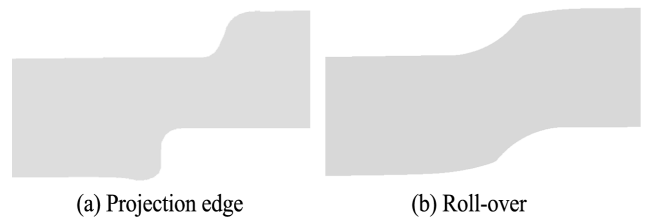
Blanking with tool edge radius of (a) 60 μm and (b) 300 μm
